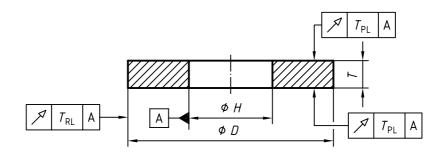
Straight grinding wheel, e.g. as specified in ISO 603-1
